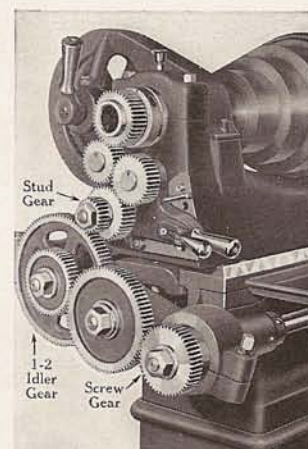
Change Gear Equipment Used on Standard Change Gear Lathes.
